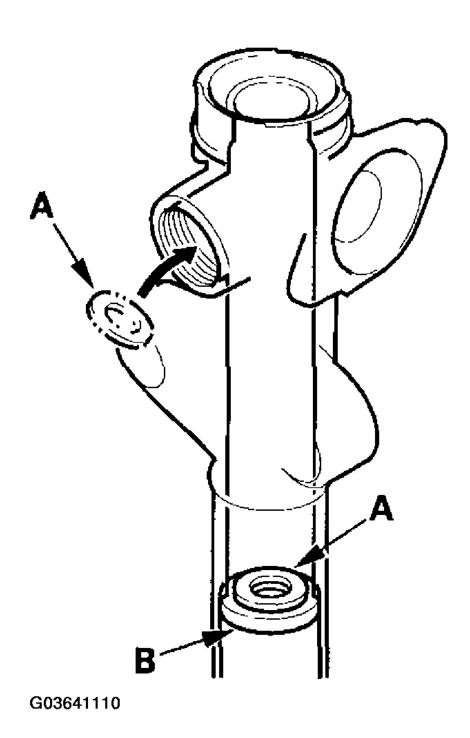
Installing Washer Courtesy of AMERICAN HONDA MOTOR CO., INC.
